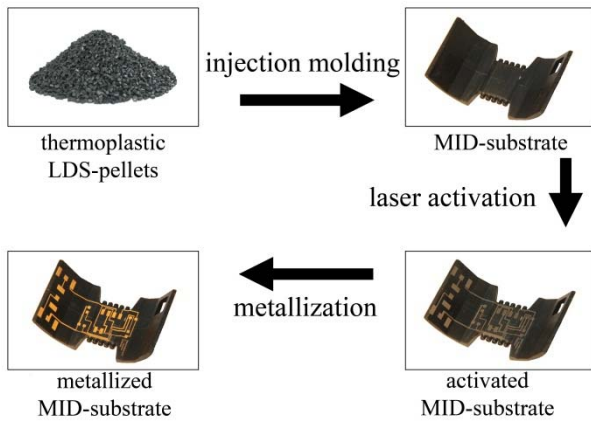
LDS (laser direct structuring) fabrication process used to fabricate the fluidic interposer.
